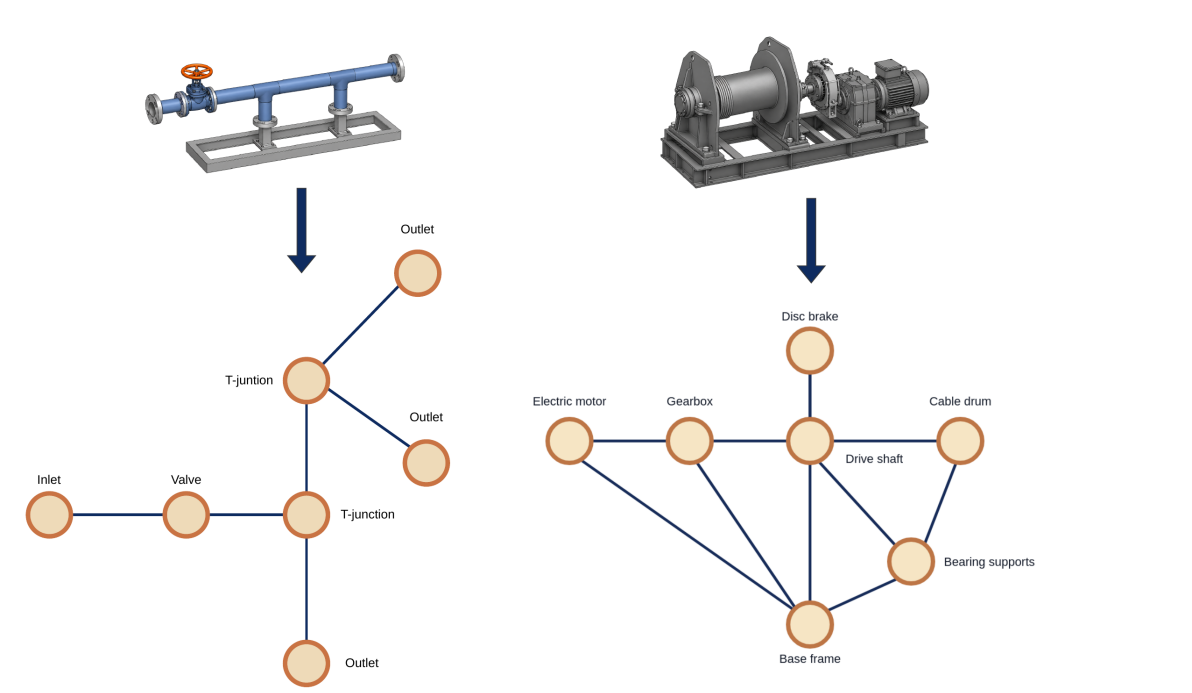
Engineering designs as graphs. Left: a piping manifold mapped to nodes for the inlet, valve, T-junctions and outlets, with edges for flow connections. Right: a winch assembly mapped to motor, gearbox, shaft, brake, drum, bearings and base frame, with edges for mechanical interfaces. Not shown: nodes and edges (links) can have attributes for a richer presentation. For example, a node for a 3D part could have attributes describing its shape.
